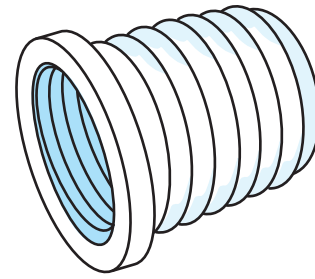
This solid-bushing insert is threaded on the outside, to grip the workpiece. The inner threads match the desired bolt size.
